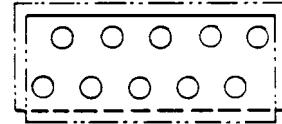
Staggered spot weld / Sicksackpunktsvets
